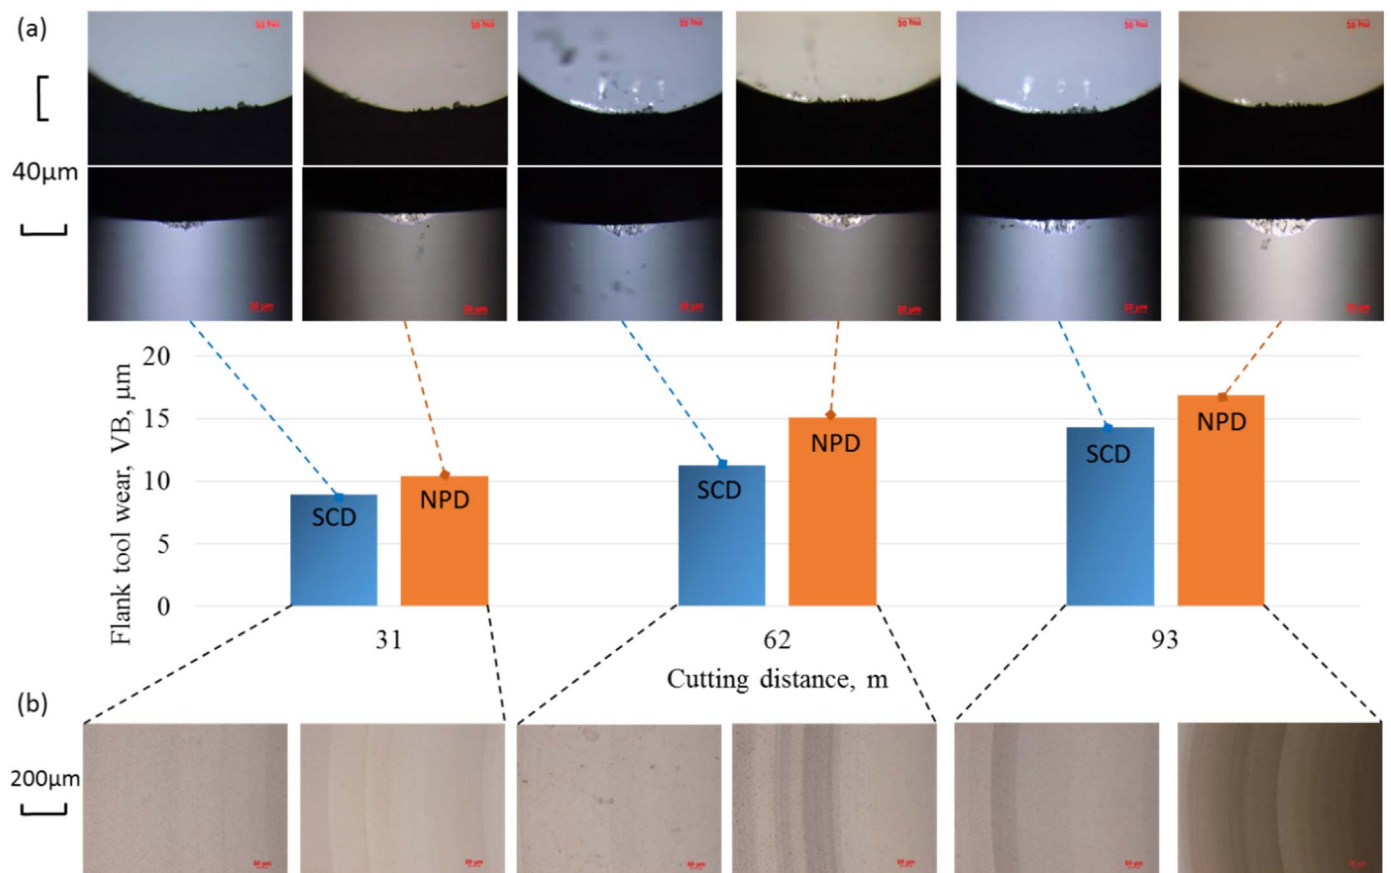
(a) Diamond tool wear conditions against the increment of cutting distance, (b) machined WC workpiece surface taken by microscope.
